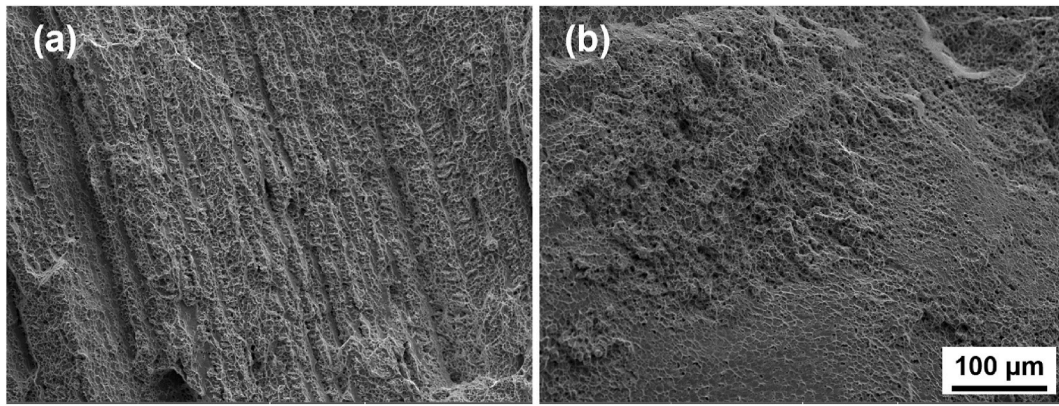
Fractography of tensile tests: (a) horizontal and (b) vertical.
